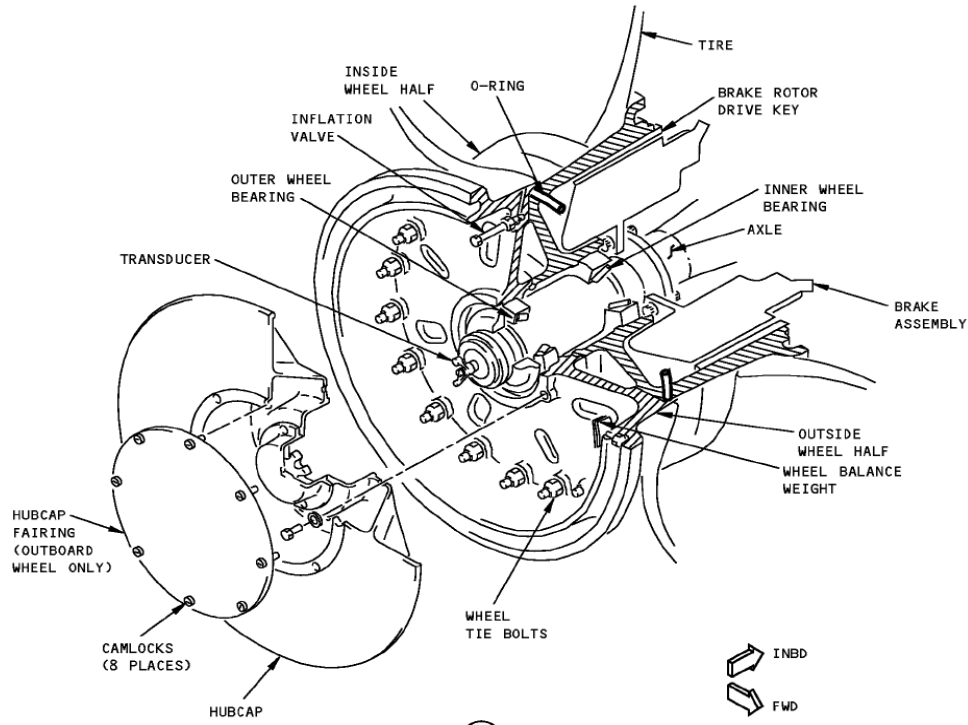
An extract from the aircraft maintenance manual of the parts of Boeing 737 Main Landing Gear Wheel Assembly (Boeing, 2012).
